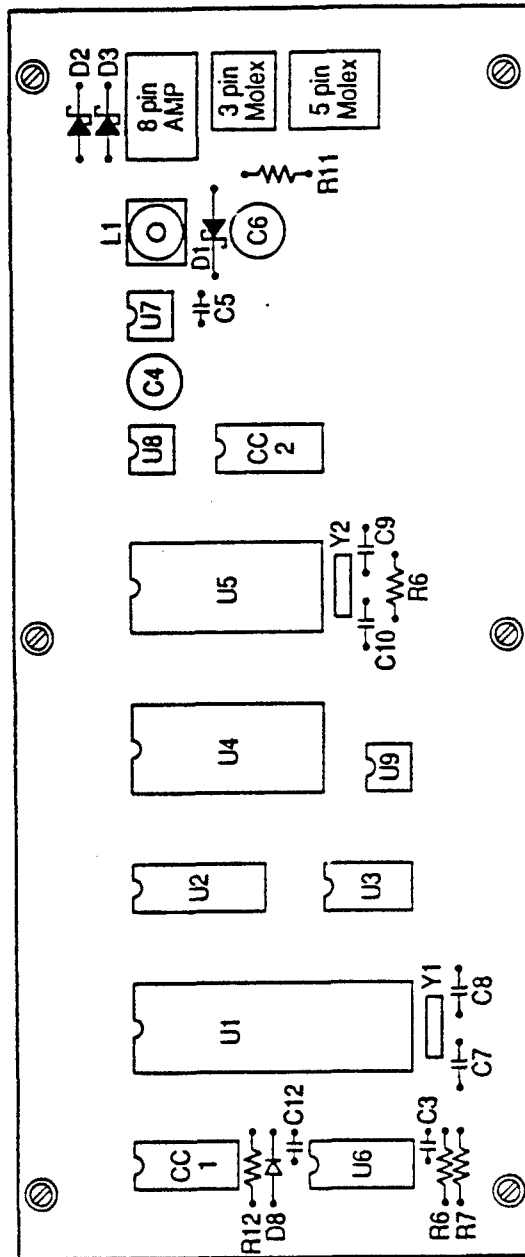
The layout of the DPM processor board is shown. Component identification can be made by referring to Figure 12 and Table 3. The layouts of the component carriers CC1 and CC2 are shown in detail.
